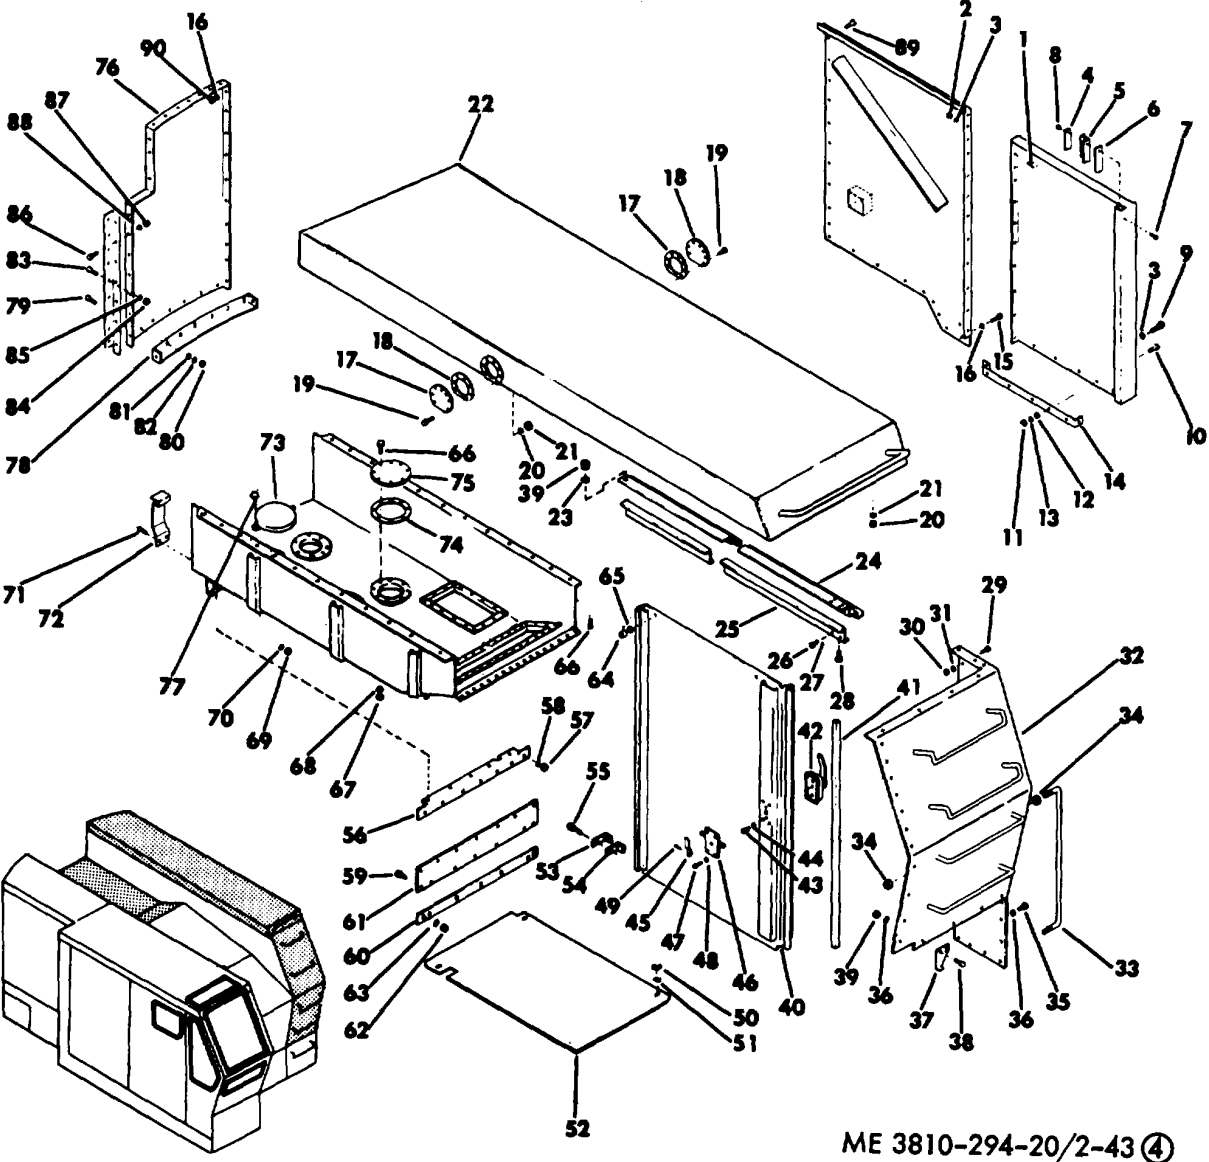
Cab sheet metal, removal and replacement (Sheet 3 of 6)
